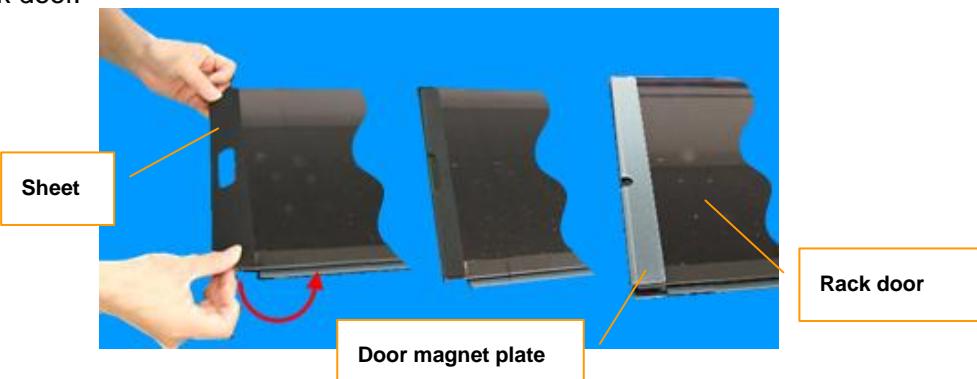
Attachment of sheet and door magnet plate
